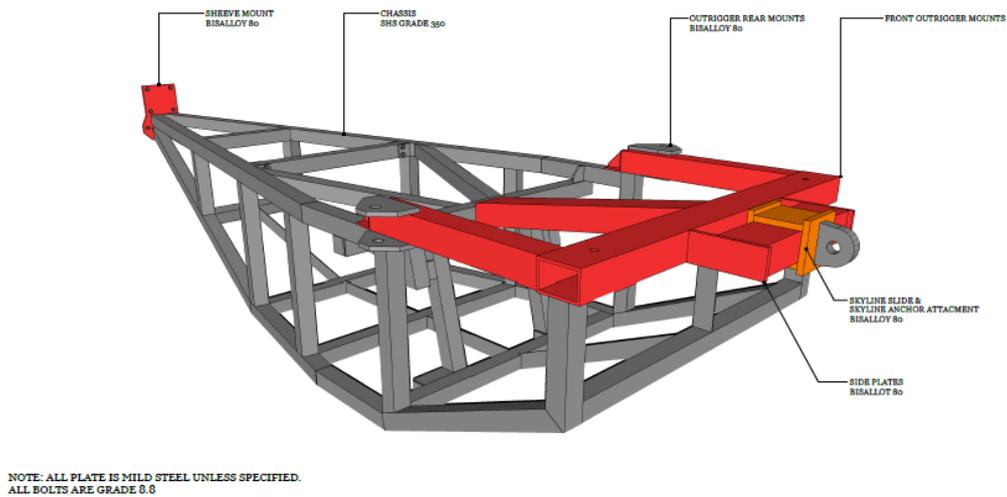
Mounts for outriggers and slide bar mechanism (orange) which will help balance carriage when winch ropes are unevenly spread
